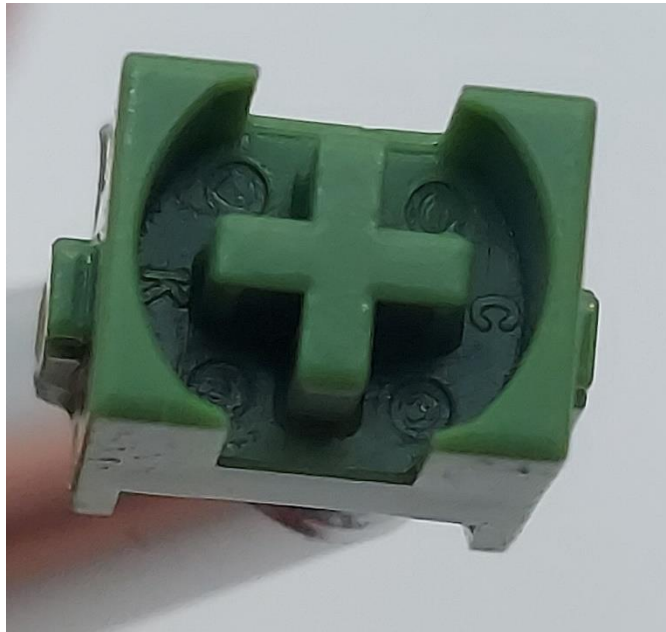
TTC Wild stem mold identification and manufacturing marks.
